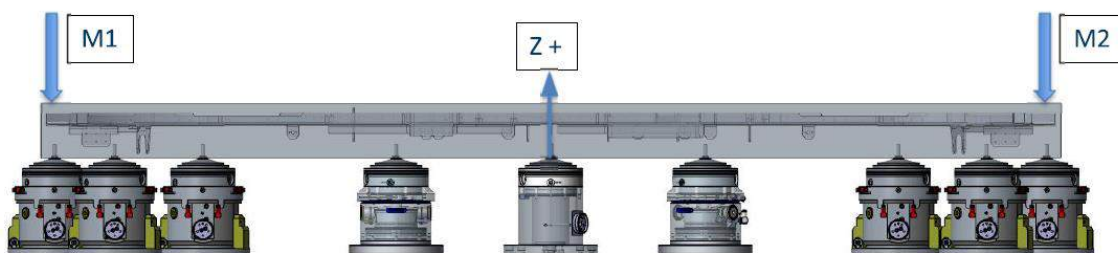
Scheme of mounting the element in a side view and measuring the height of the element on the machine tool - after the OP20 operation at points M1 and M2.
